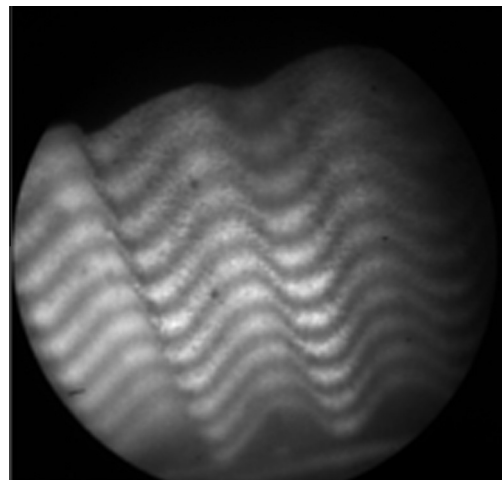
Fringe image of the gearing features on the TR 73 tool.
